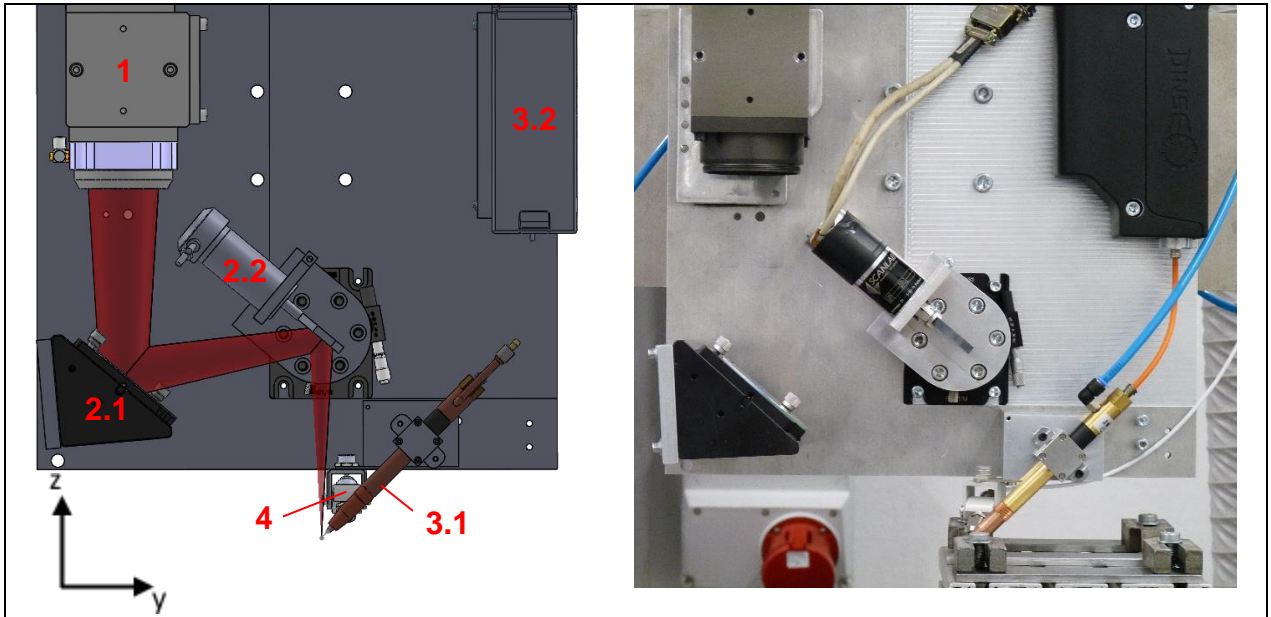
Laser cladding system. 1: Laser head. 2.1: Static mirror. 2.2: Movable mirror. 3.1: Wire torch. 3.2: Wire feeder pusher. 4: Pyrometer.
